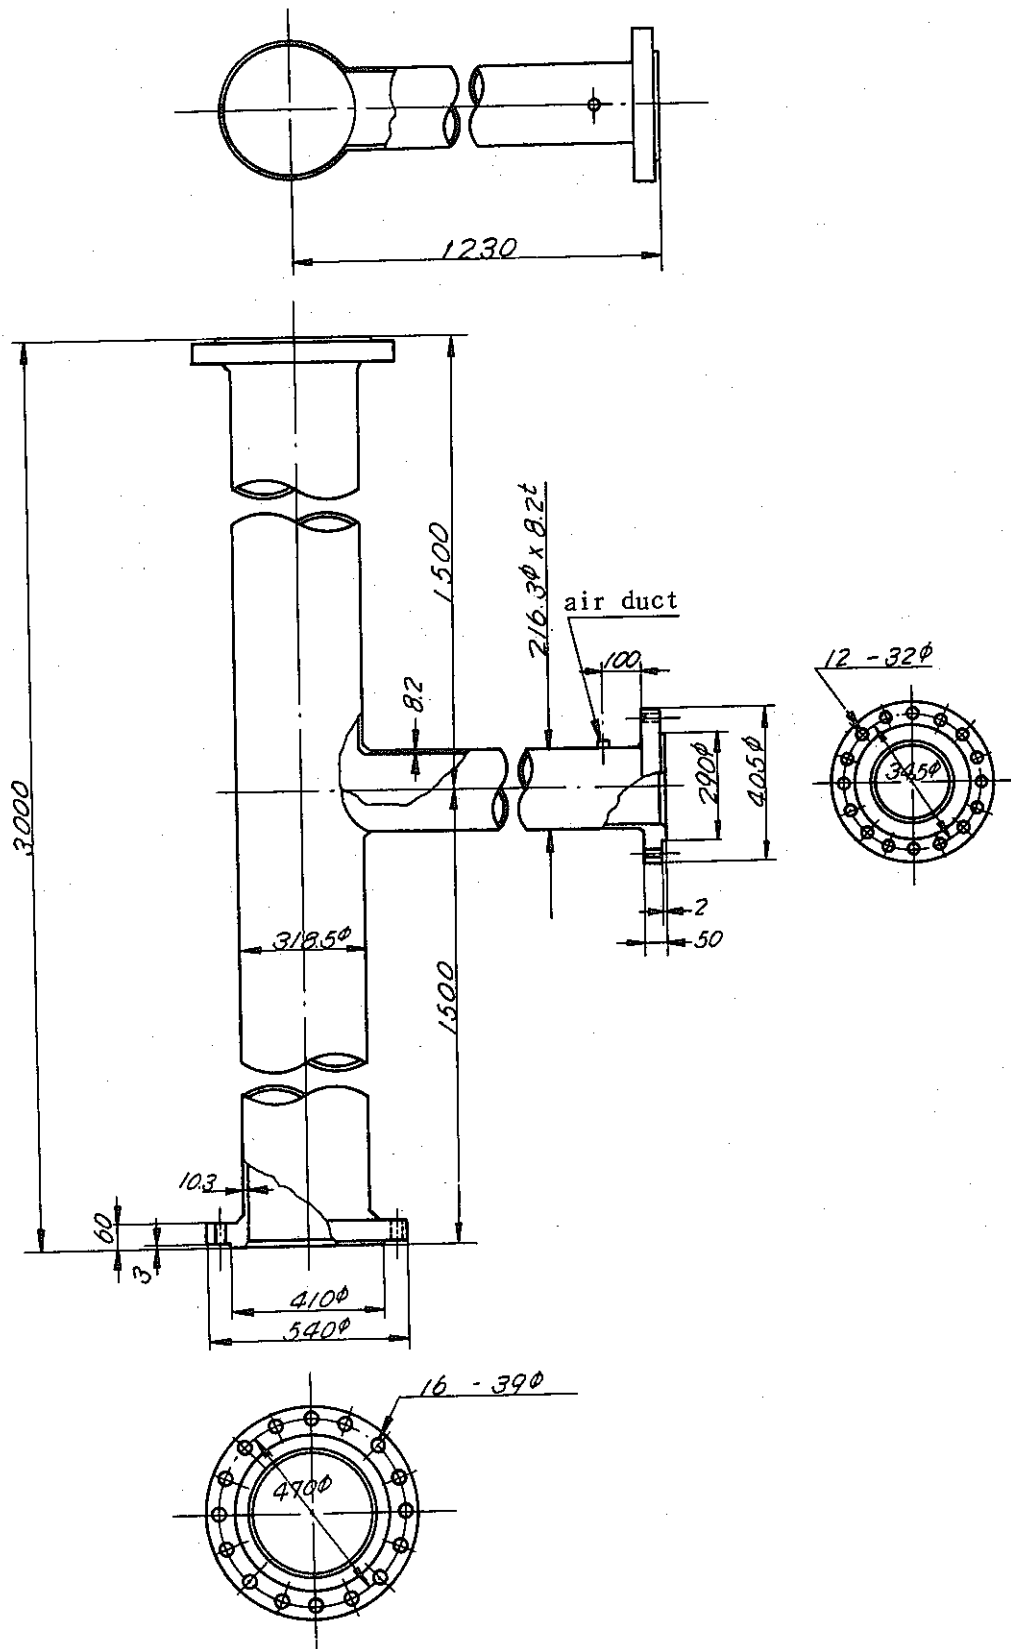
c) Shape of Branch Tube (12B - 8B)
